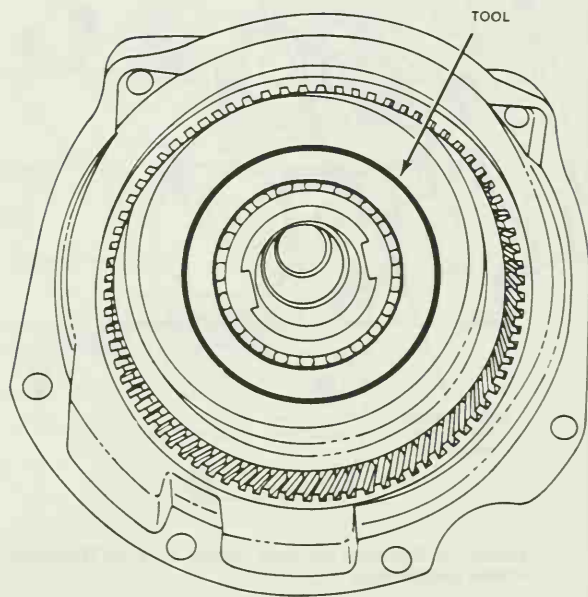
Removing the overrunning clutch. (American Motors Corporation)
